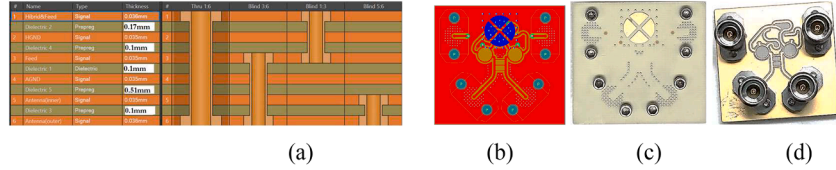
A typical multilayered PCB with antenna D and test board or hybrids: a, b) PCB in Altium Designer; c) top layer and d) bottom layer of the fabricated PCB with 2.92 connectors.
